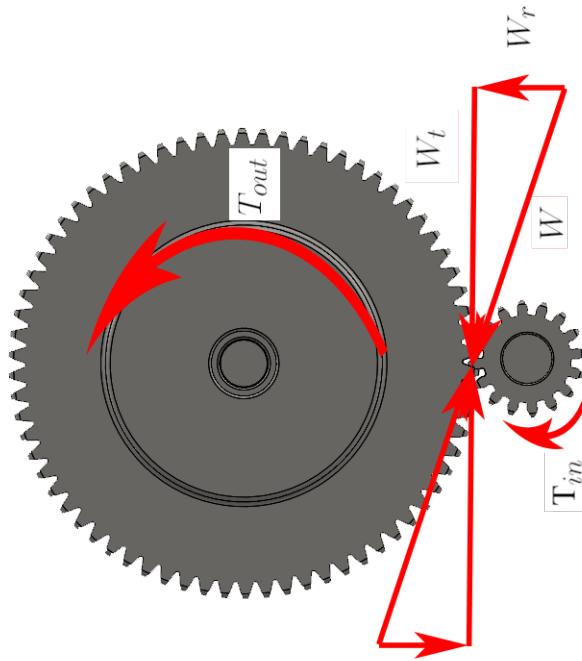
shows one set of a pinion and gear. The red arrows represent the forces and torques which act on the set. The gearbox contains two of these gear sets.
